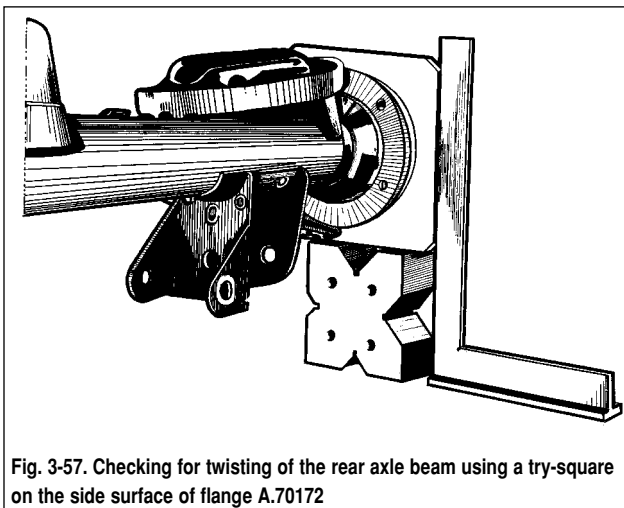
Checking for twisting of the rear axle beam using a try-square on the side surface of flange A.70172
